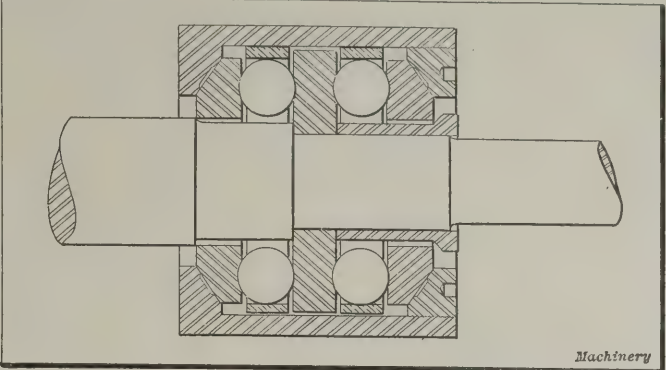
A Ball Bearing taking Thrust in Both Directions
